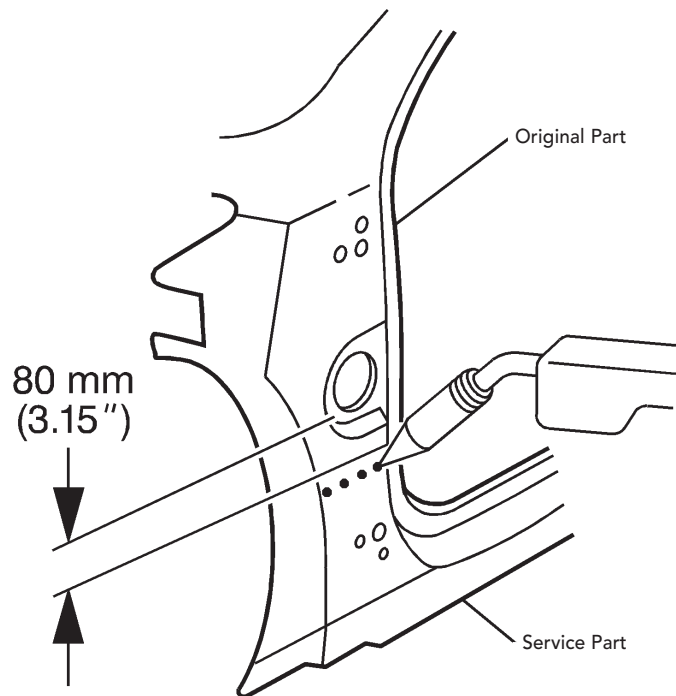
Sectioning of the outer door frame at the front hinge pillar
